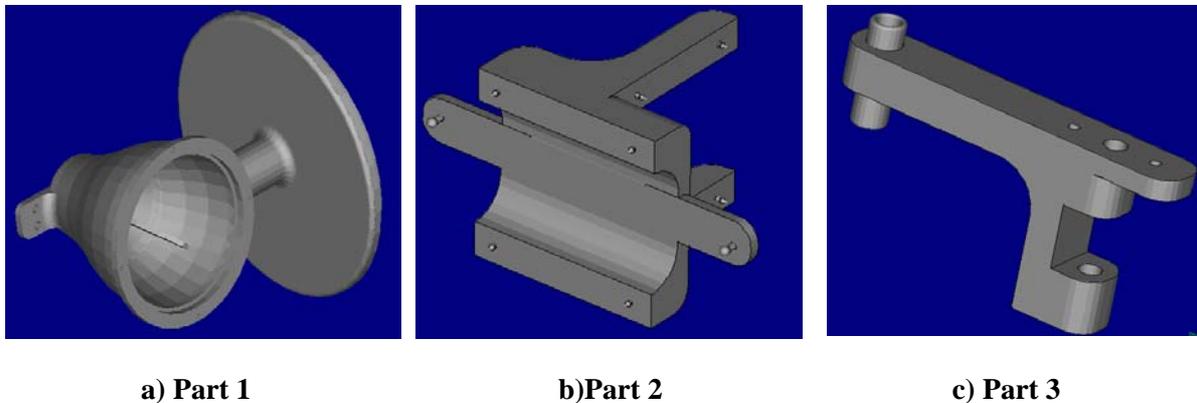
Proposed redesigns for three parts. a)Part 1(Lighting chassis of ROV), b) Part 2 (camera support of ROV), c) Part 3(Transmission for MRM))
